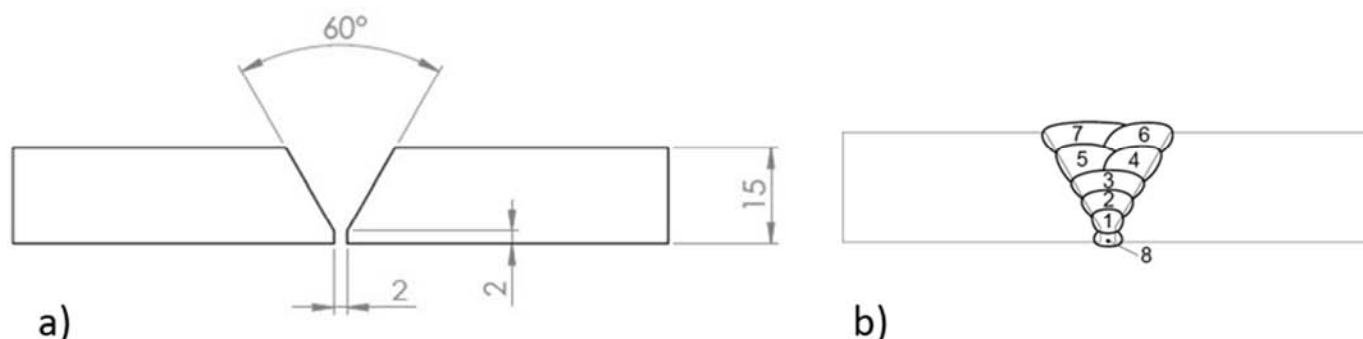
a) butt joint (BW) edge preparation, b) weld passes position
